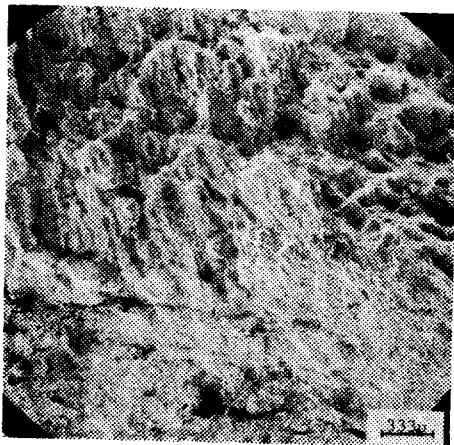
Fractographs welded specimen by dried elecmode at $\sigma=65kg/mm^2$
